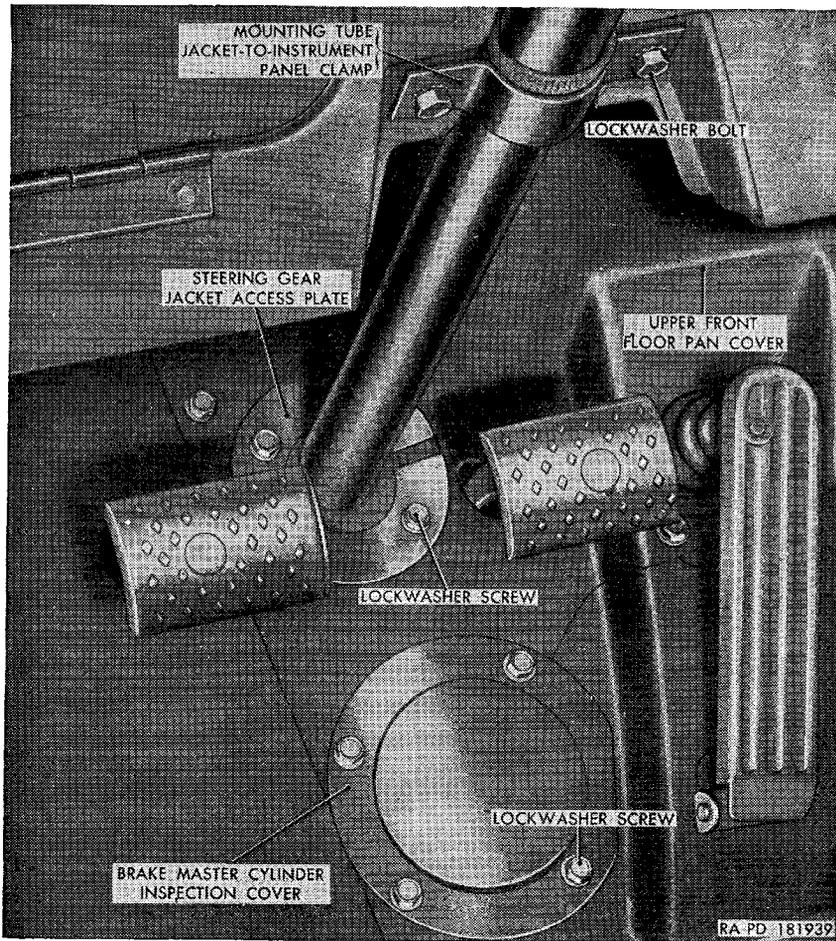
Disconnect points for steering gear removal—driver's compartment.
